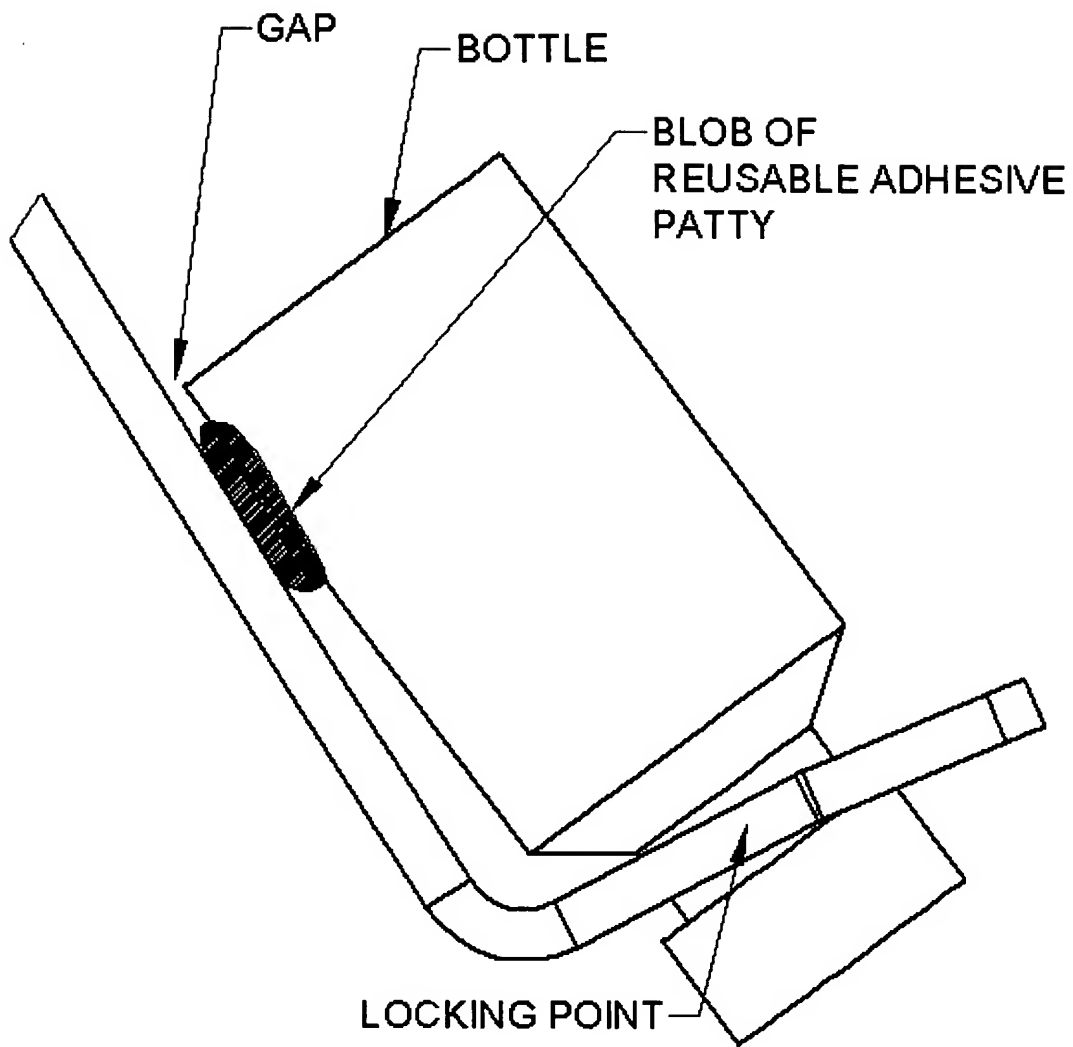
Fastening device using a blob of reusable adhesive patty.
